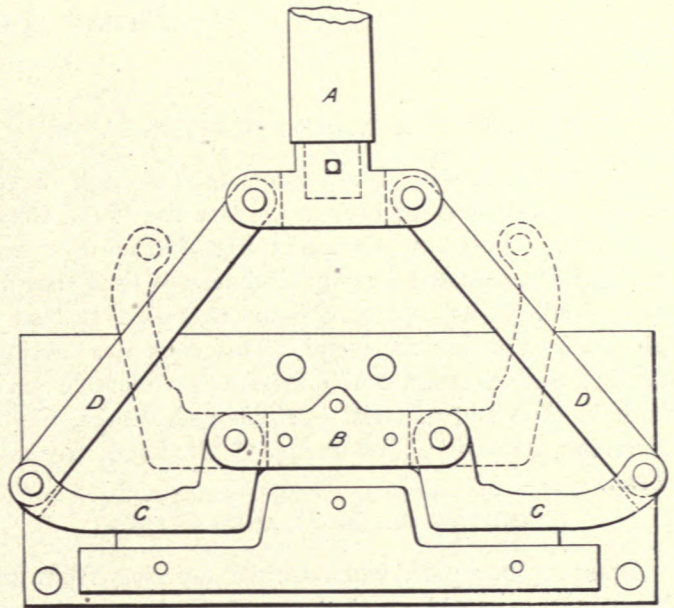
Tool for Making Wedge Bolt Keepers, or Coupler Carrier Irons.
